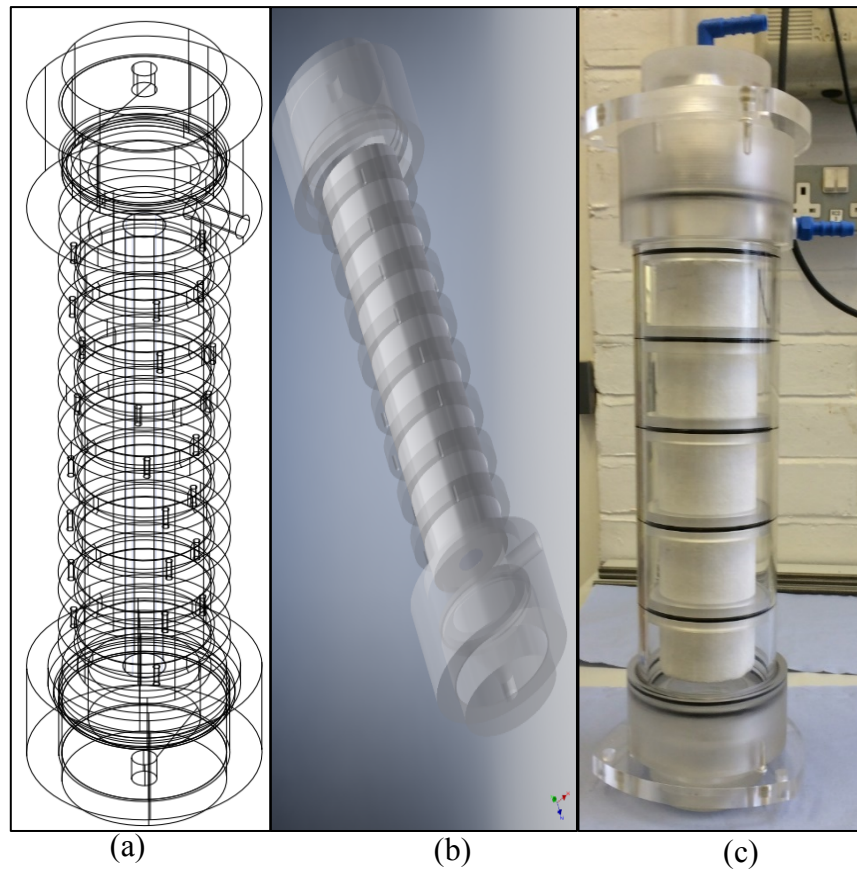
Photograph of the assembled tubular filtration membrane housing. (a) Detailed drawing produced using AutoCAD of the cross-sectional view of the membrane housing (b) Artistic representation produced by AutoDesk Inventory (c) Leakage tested and assembled housing filtration unit
